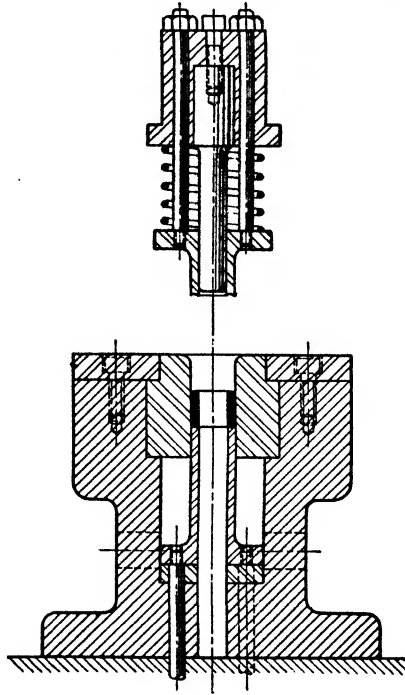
Sizing of porous metal bushings after sintering, as performed in either single-action or double-action (Fig. 395) mechanical presses.
